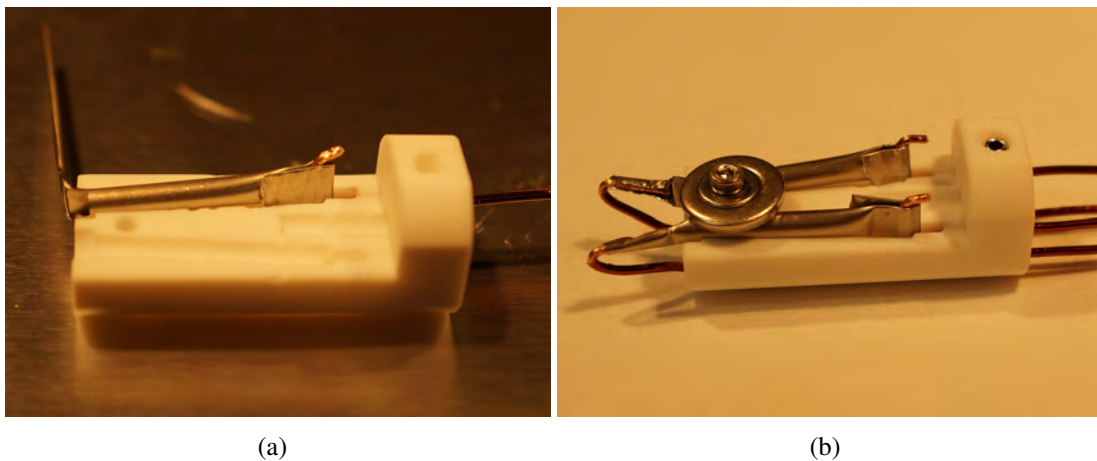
Assembling process of the ovens. Picture (a) shows the Macor holder with one partially connected oven. While the lower part of the oven is already folded and clamped to the copper wire, the upper metal stripe still has its original form. In picture (b) the assembly is completed, both ovens are connected and fixated with washers. The alignment of the ovens is slightly tilted so that the atomic beams cross 43.5 mm above the holder. In the end the oven mount is positioned inside the titanium holder in such a way that the crossing point coincides with the center of the trap.
